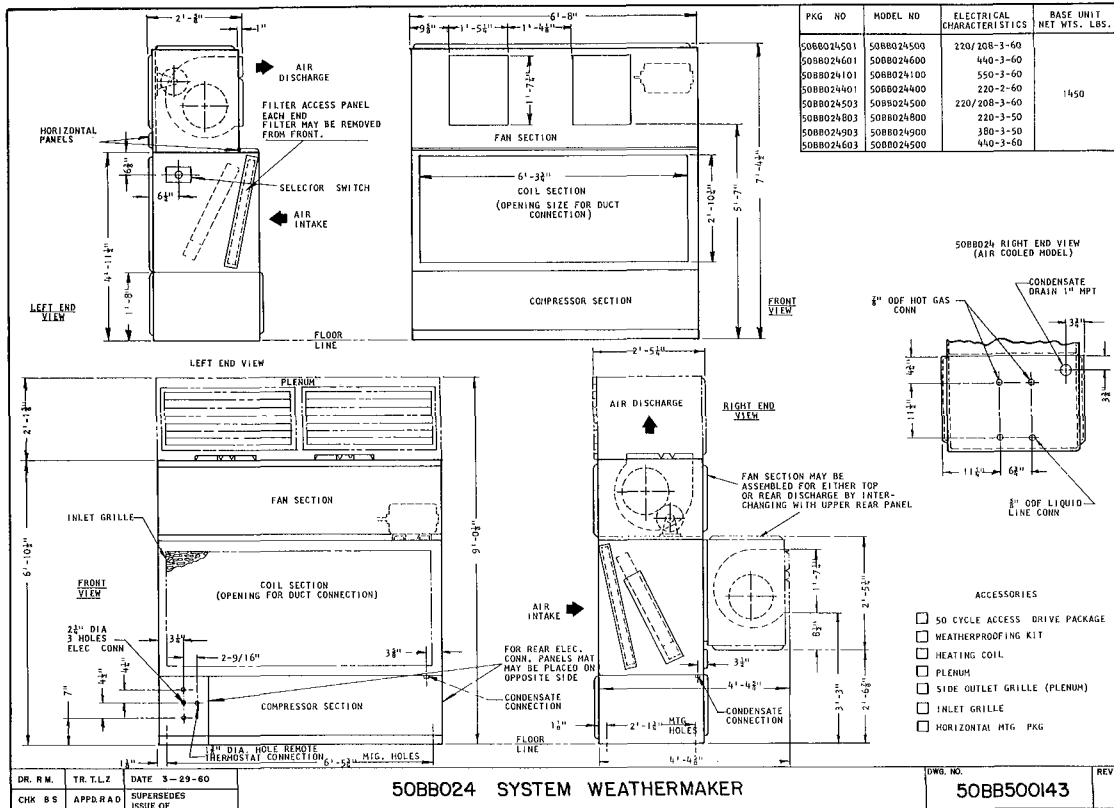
DIMENSION DRAWING - SELF-CONTAINED UNITS
